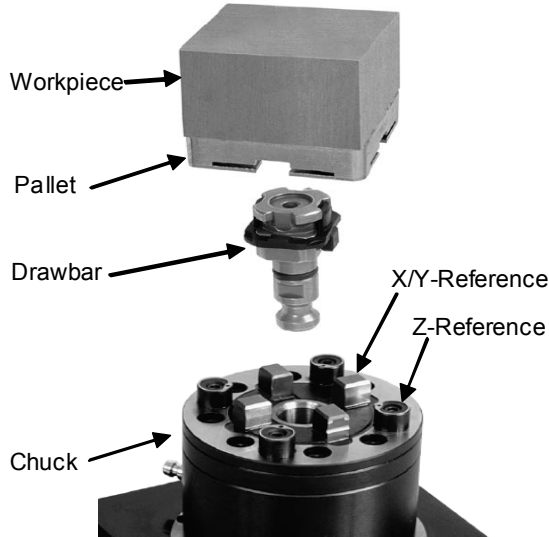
Elastic Averaging Mechanism in the MACRO System
